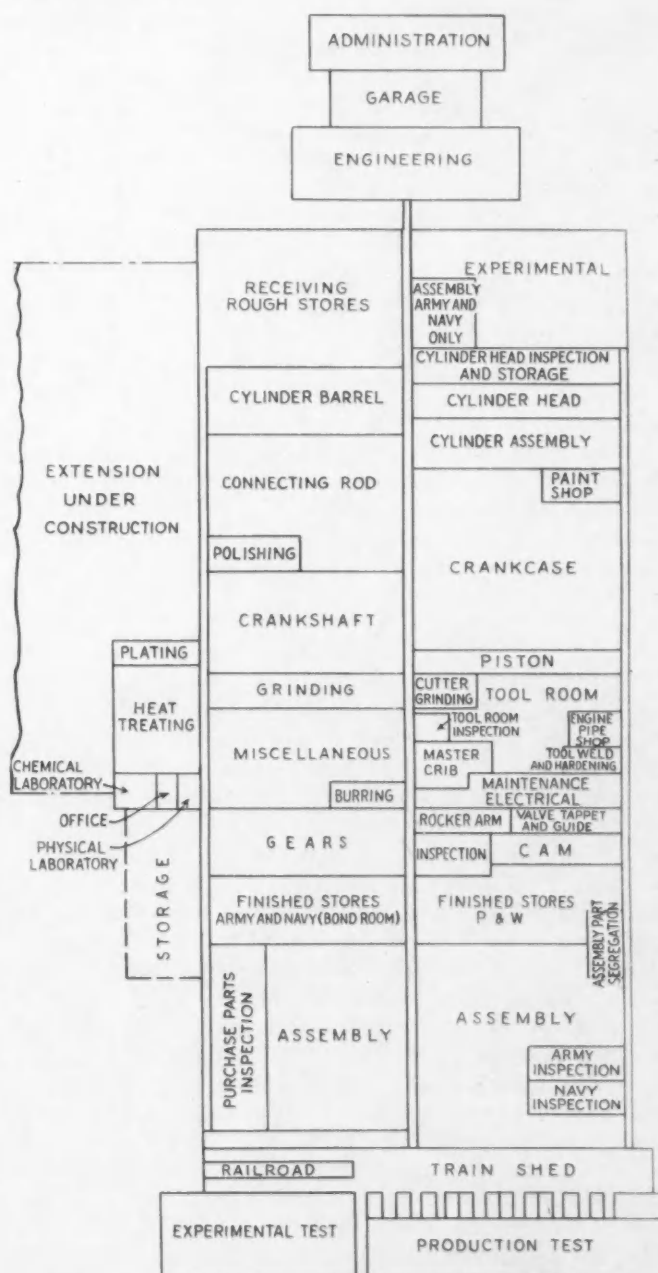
Schematic Floor-Plan Layout of Engine Division of Pratt and Whitney Aircraft - Dashed Lines Indicate the Hamilton Standard Propeller Extension Now Under Construction
